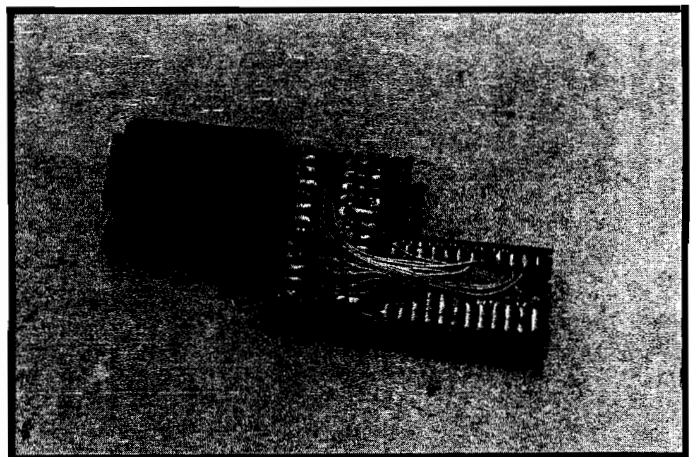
Bottom view of finished module. See text for commentary on wiring.
